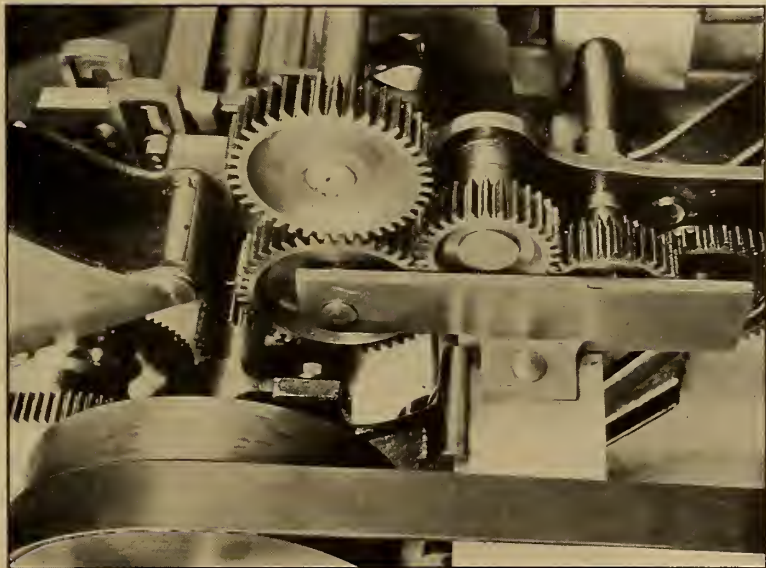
ROLLER WHEELS OF A DRAWING FRAME
